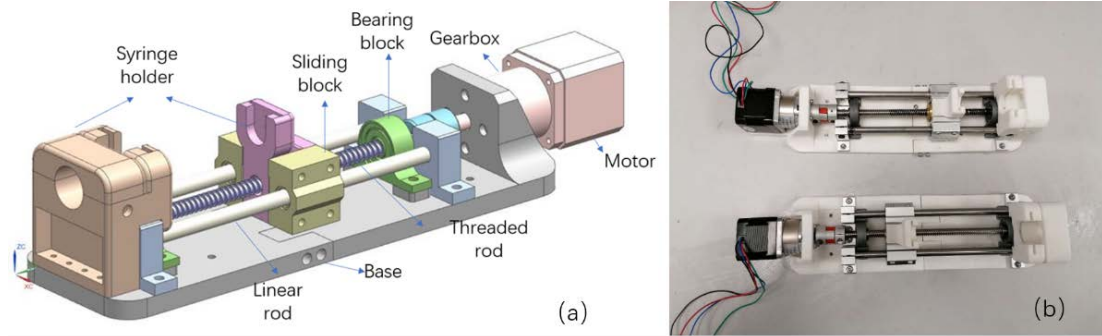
(a) Upgraded syringe pump 3D drawings; (b) printed and assembled working syringe pump.
